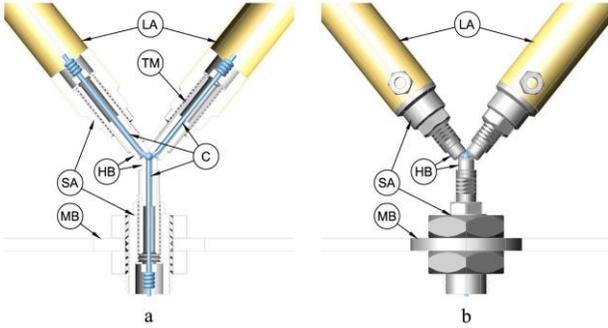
Connector joint assemblies, shown in (a) section and (b) side view.
